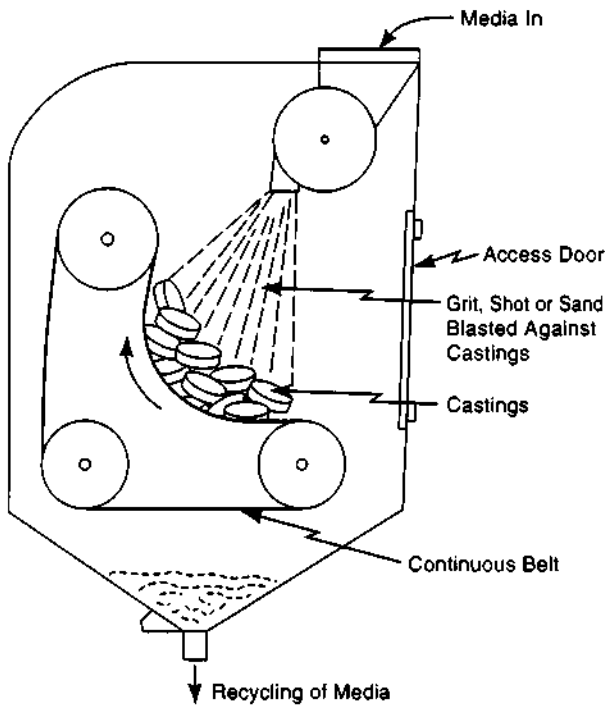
B8c-2 A tumble blasting machine for cleaning castings. The continuous conveyor causes the castings to tumble while being subjected to the blast of media, which removes sand and scale from the surfaces of the casting.
